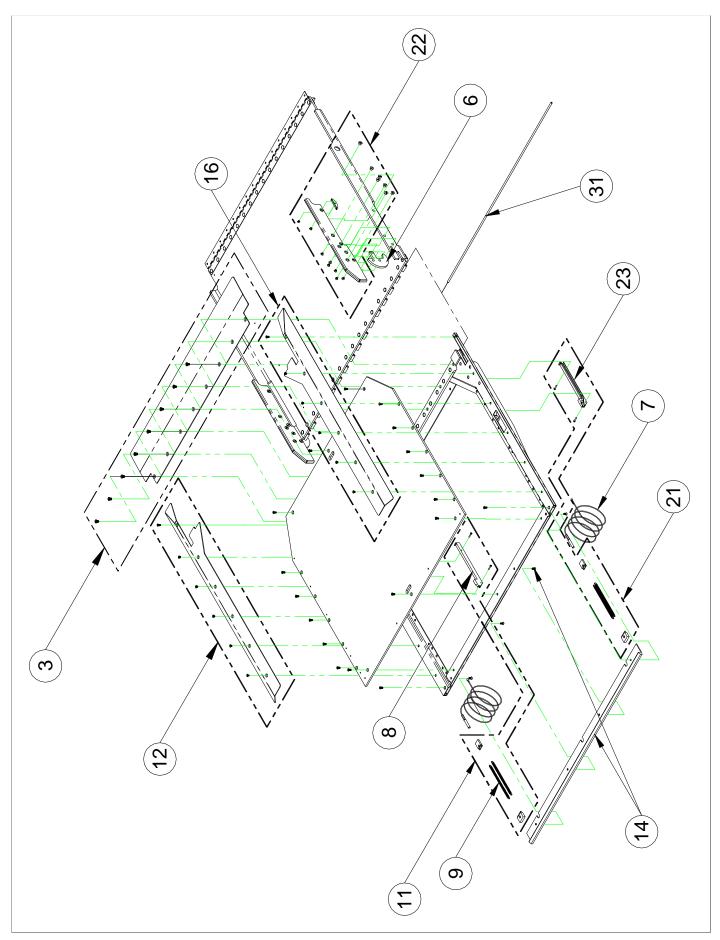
RAMP AND TOP SUPPORT ASSEMBLY SHEET-2
